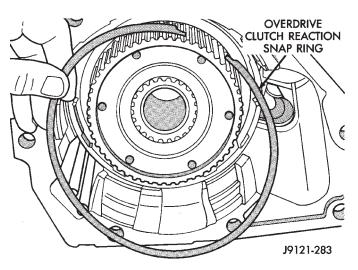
Removing Overdrive Clutch Reaction Snap Ring
